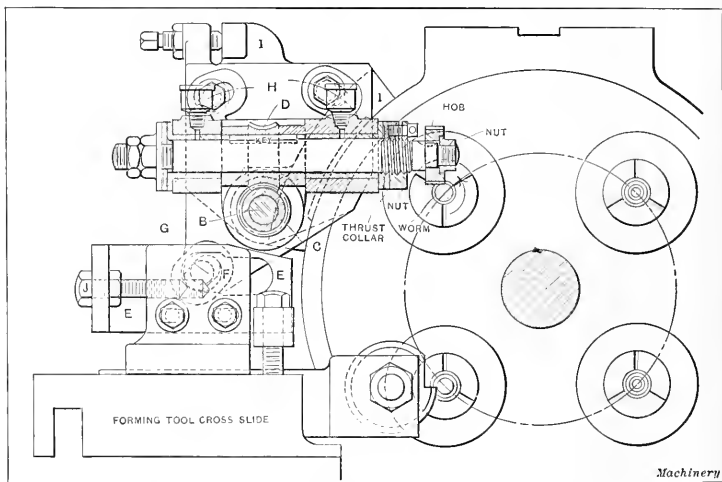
Arrangement of Worm Hobbing Attachment on Automatic Screw Machine
